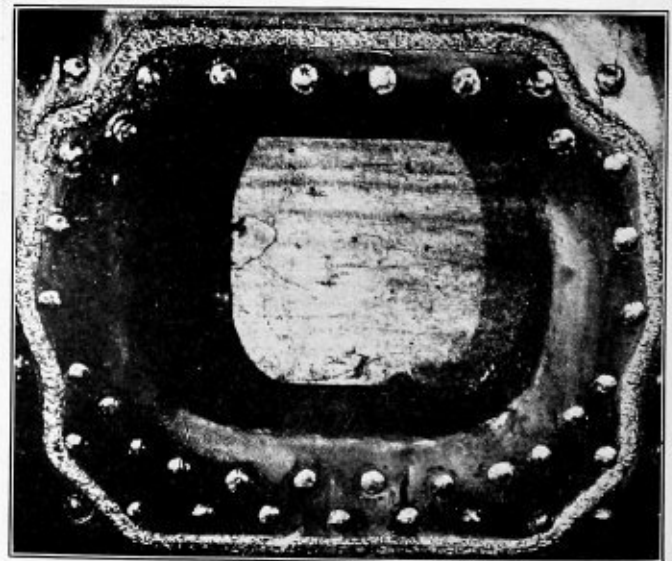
Showing Practice of Welding in a Door Hole Collar
